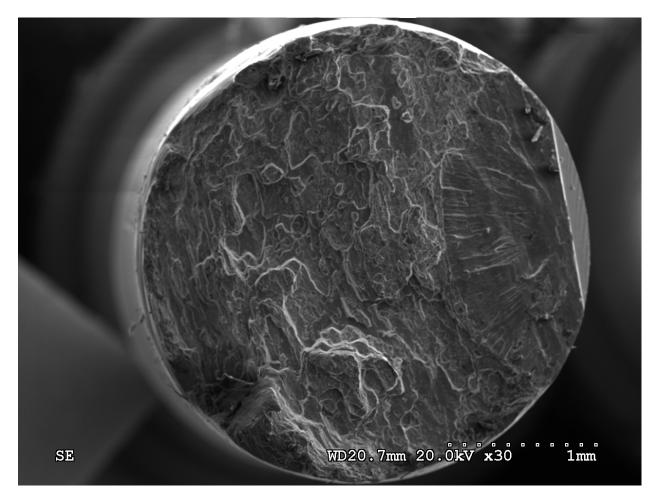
Fracture surface of miniature tension fatigue specimen (Al 7075 alloy)
